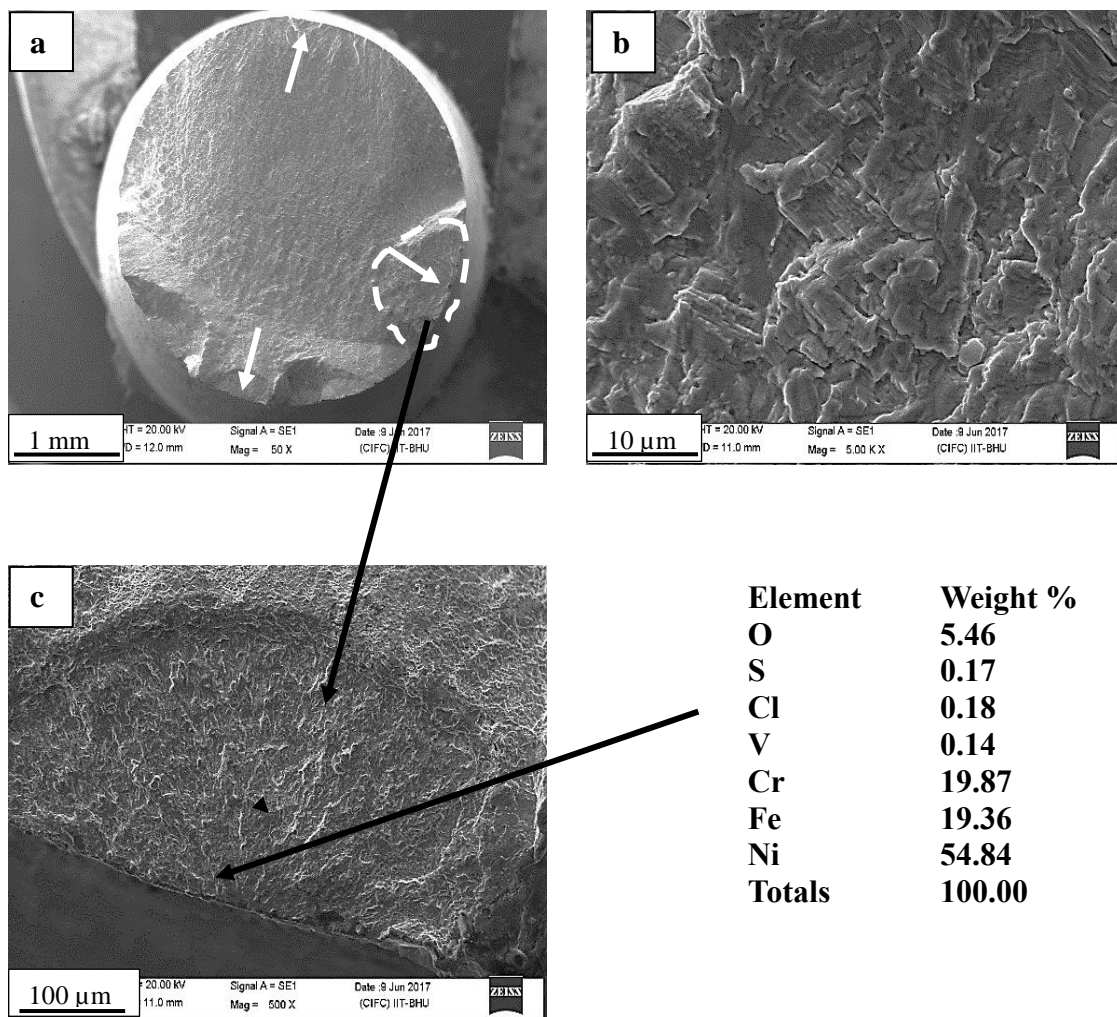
8: Fractographs of the fatigue sample pre-corroded and fractured from HCF at the stress amplitude of ± 500 MPa at 600°C in air showing: (a) fracture surface and crack initiation sites, (b) fatigue striations and (c) EDS analysis close to the crack initiation site.
